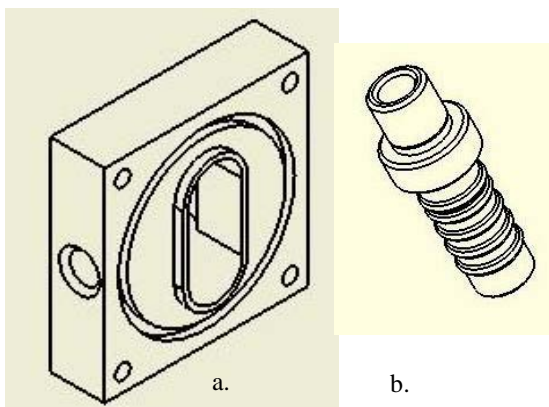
Drawings of the "Side Cap" and "Connecting Piece".
